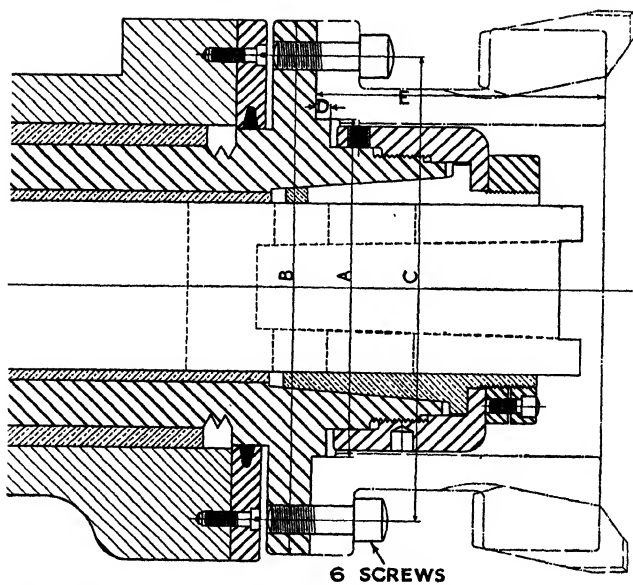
Facing Cutter attached to the Boring Machine Spindle.
